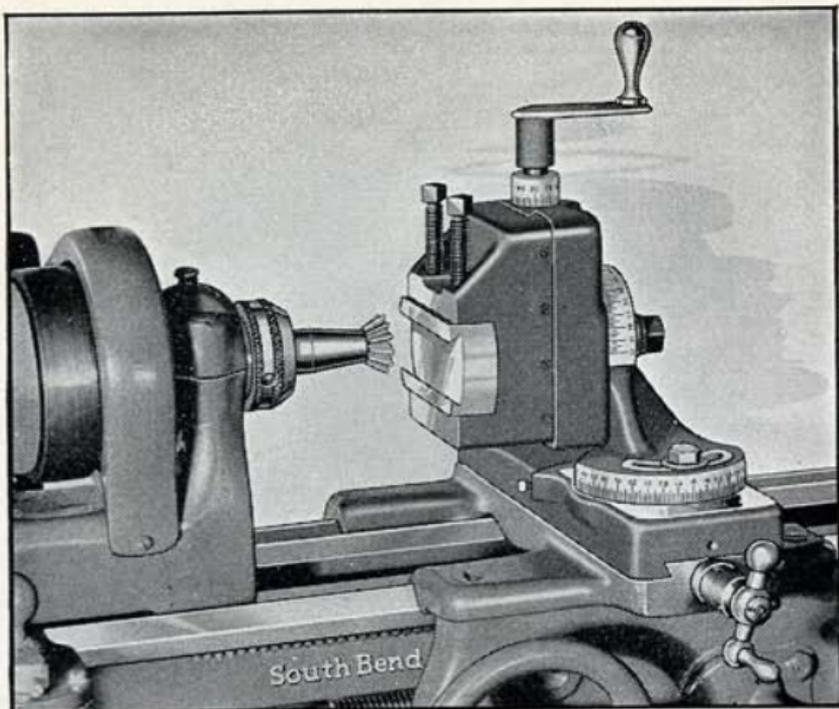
Milling a Dovetail on Lathe Using Milling Attachment.
